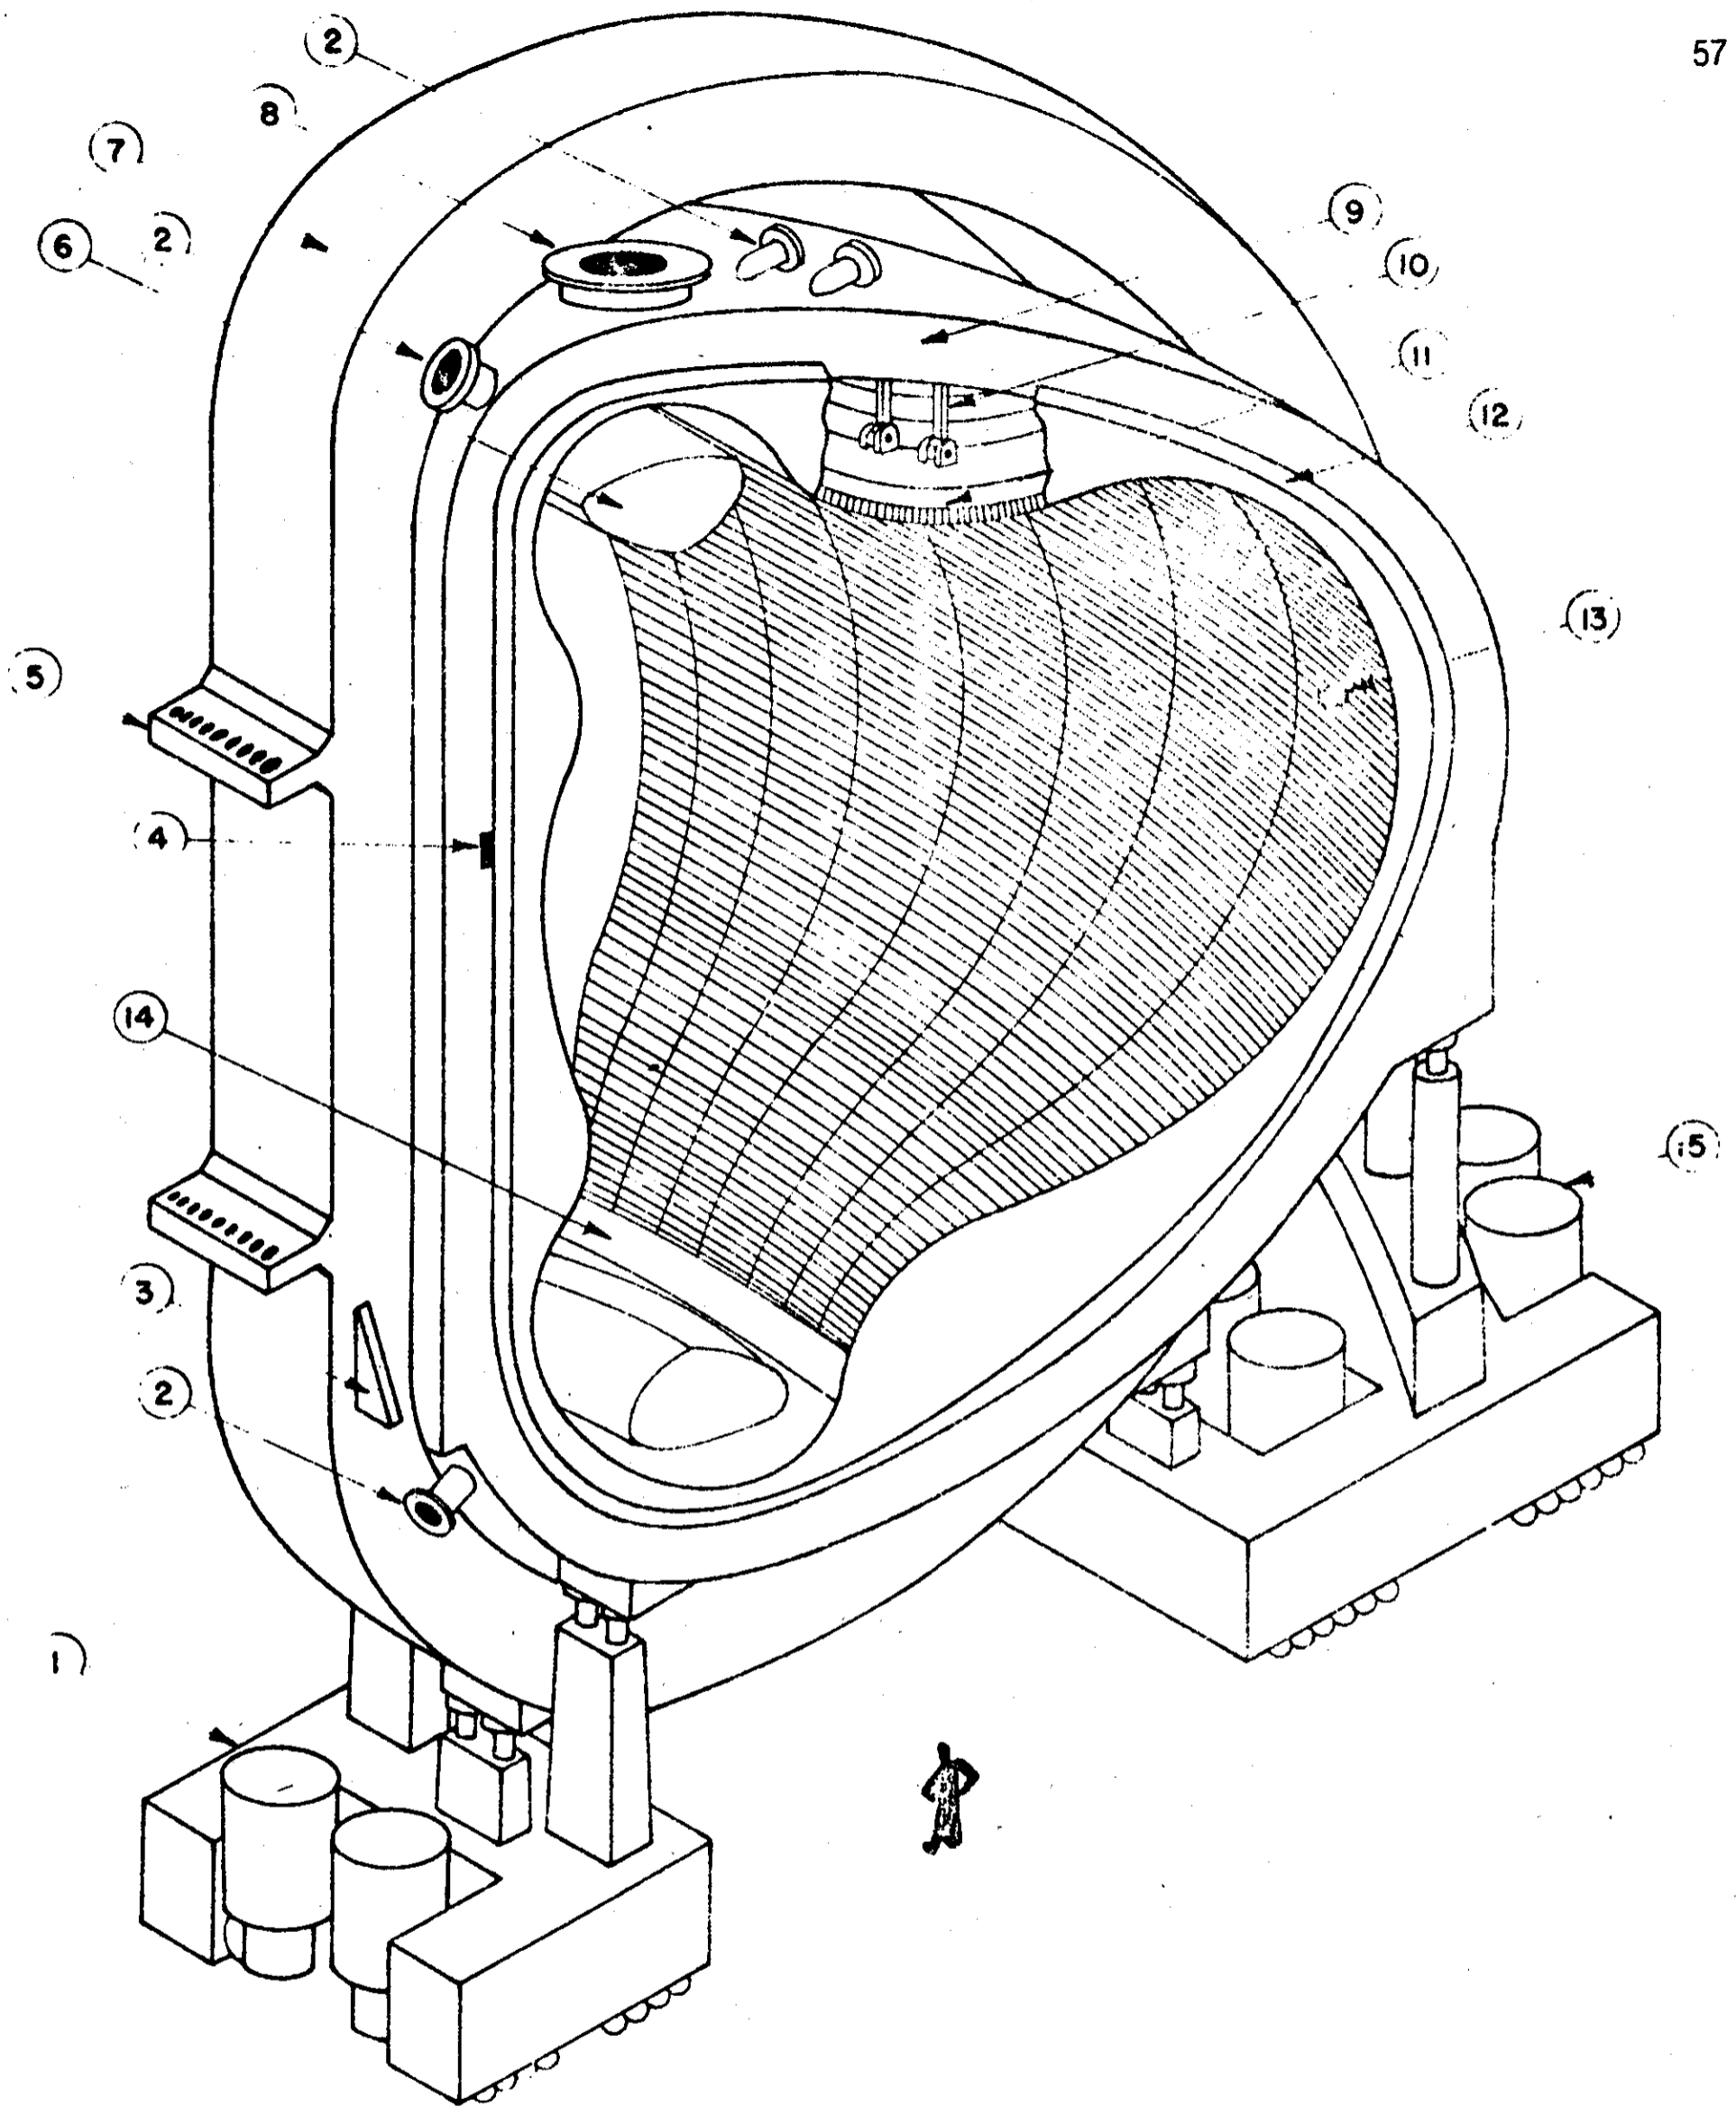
Isometric View of a Complete Section of Heat Removal Cells
